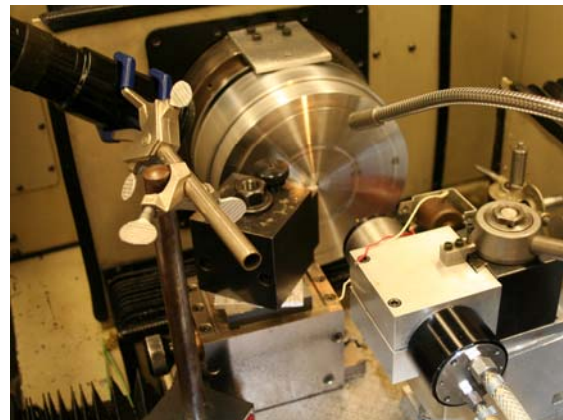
Tube mounting plate being faced. The plate is rotating on the spindle while material is being removed with the tool mounted on the micro-height adjuster. The boring spindle is in position in the lower right.
